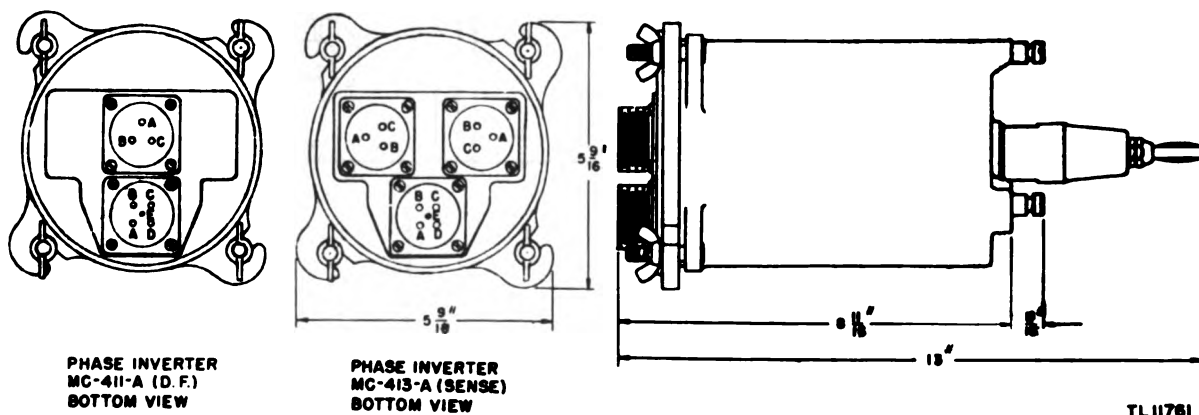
Outline drawing of Phase Inverter MC-411-A and MC-413-A.
